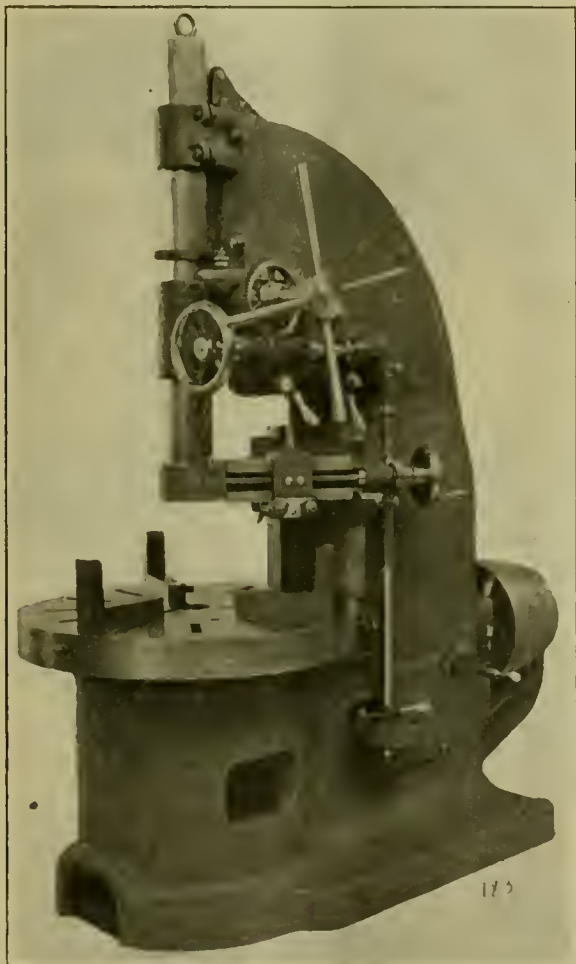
CAR WHEEL BORER.—BAKER BROS.
